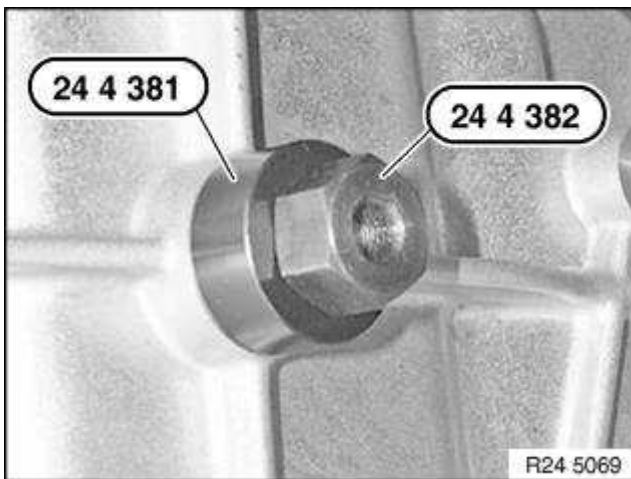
Screw In Shaft Seal With Special Tools 24 4 381 And 24 4 382
